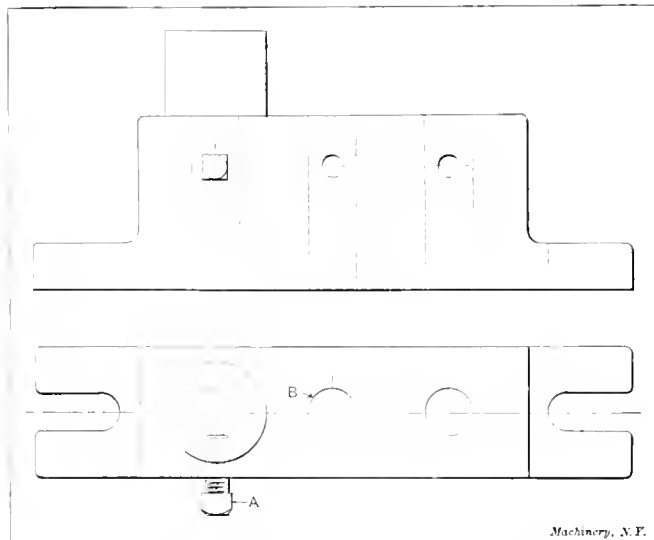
Defective Design of Fixture for Holding Piece shown in Fig. 1
